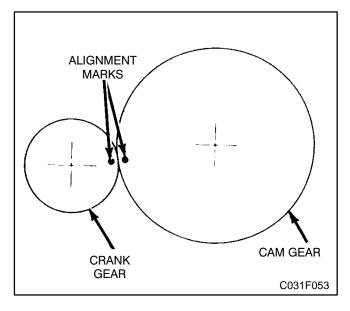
CAMSHAFT AND TAPPET REMOVAL
